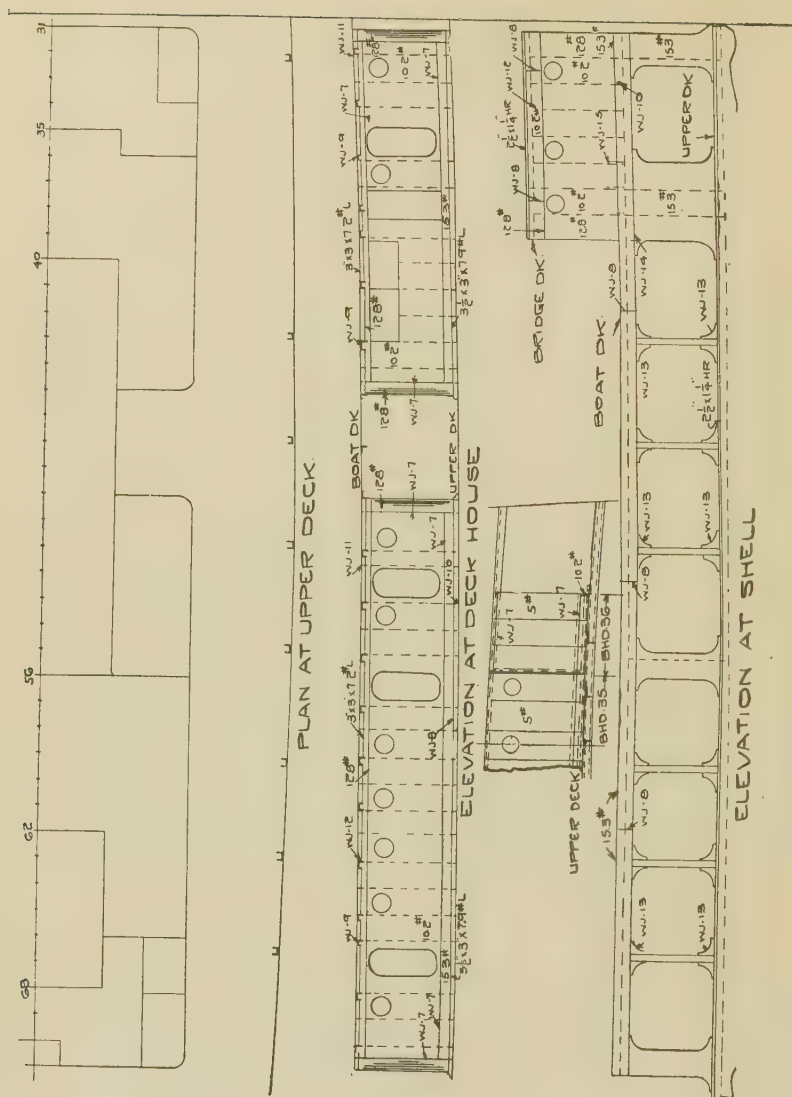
Welding of bulkheads of Coast Guard cutter *Northland*.
